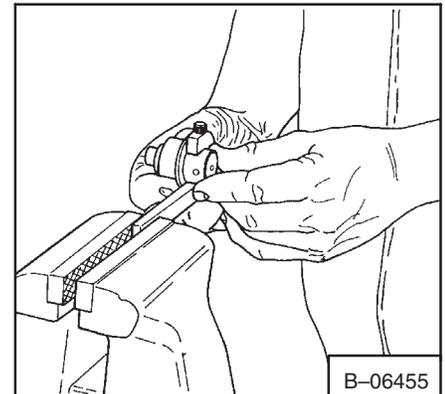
Lift & Auxiliary Detent Assembly
